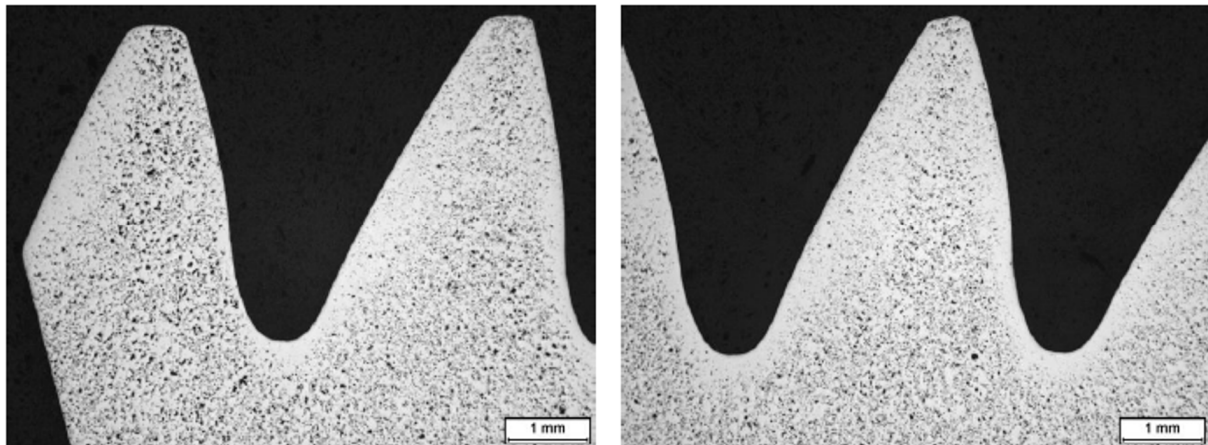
Material porosity in fractured gear is uneven for all teeth. In the left figure is the porosity higher than in another tooth in right figure.
